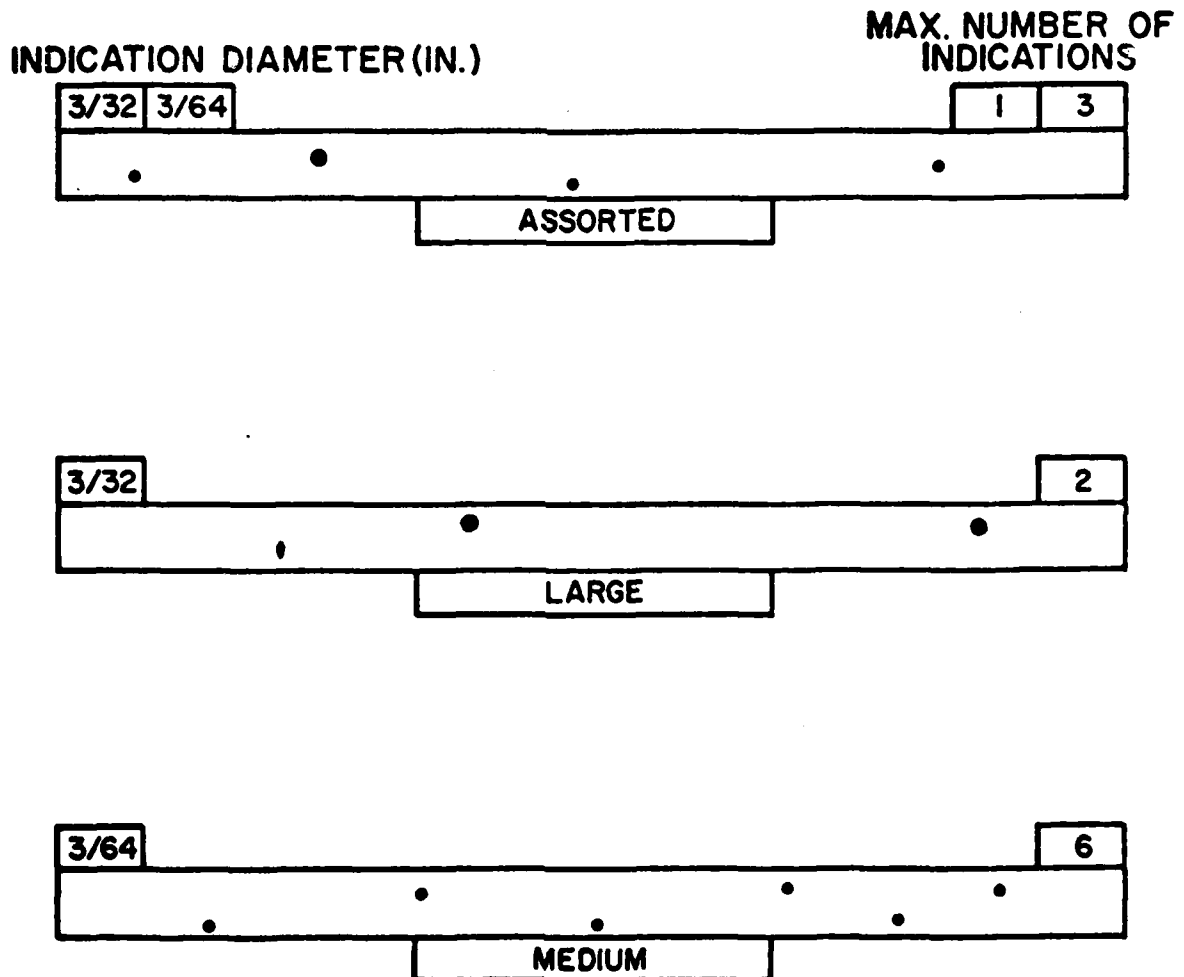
Class 2 Weld Surface Inspection Standards for Scattered Rounded or Non-Linear Indications (Sheet 2 of 6).
